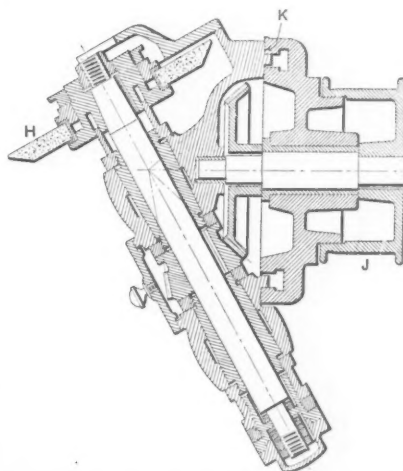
Cross-section through Wheel Spindle, showing Arrangement of Drive
